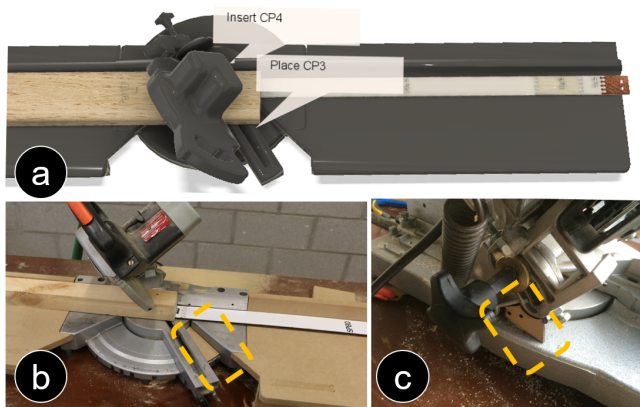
JigFab generates three constraints for the compound miter saw: (a) a fixture for aligning the work piece, and a template for (b) the miter and (c) the bevel angle.
